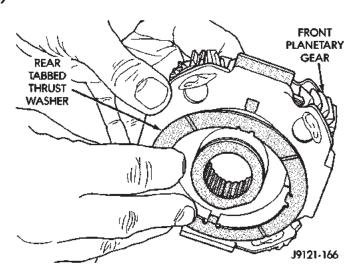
Installing Rear Thrust Washer On Front Planetary Gear
